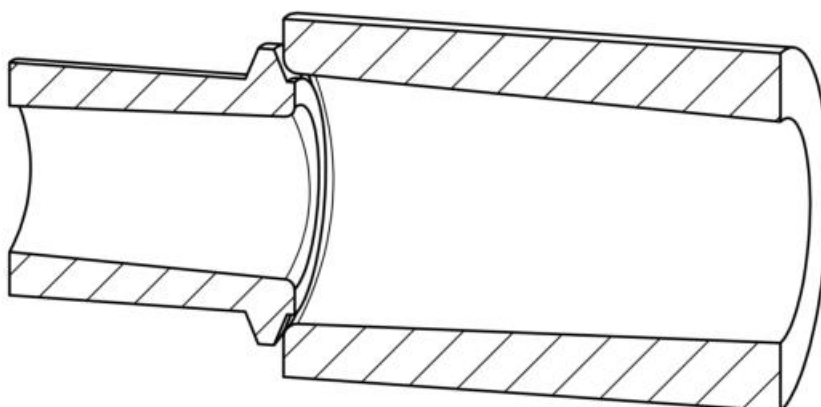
Example of a typical cylinder to full thread interface to be evaluated (cross-section view)
